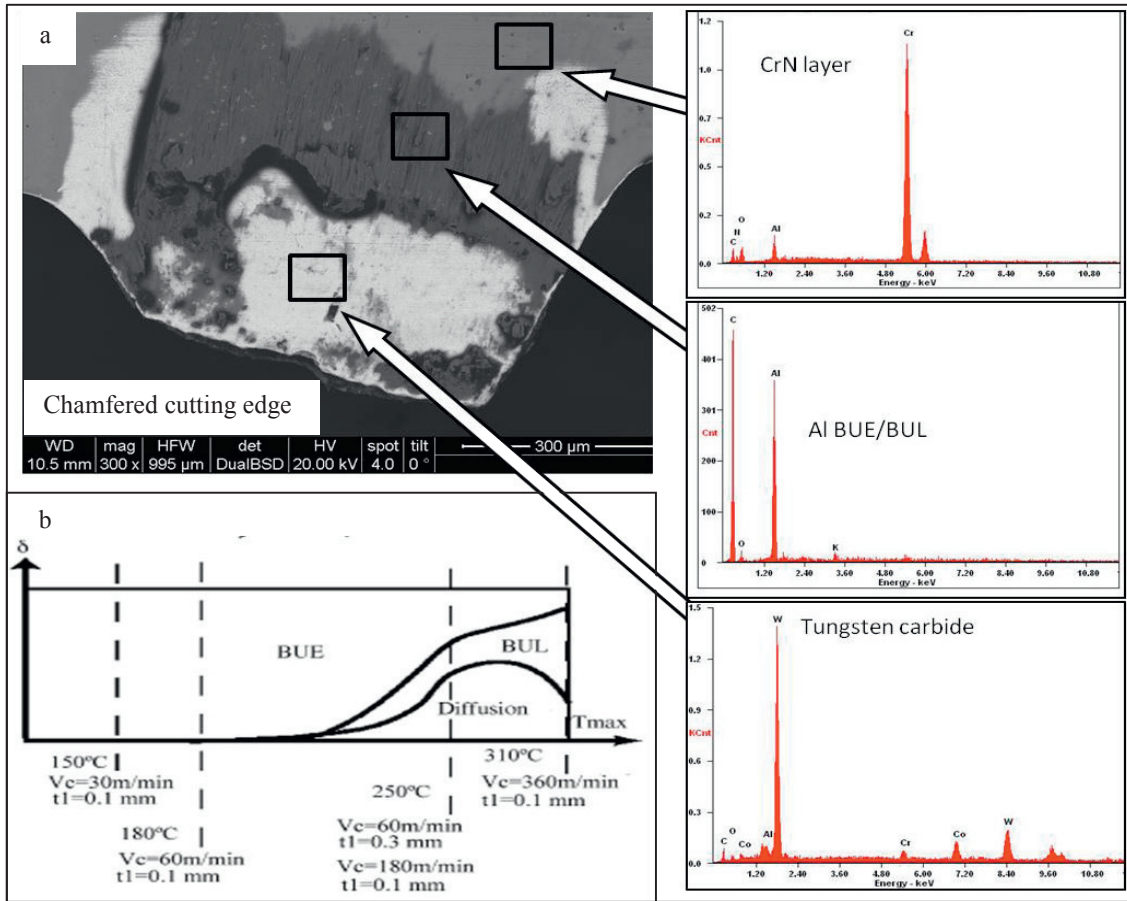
(a) Adhesion of Aluminum the tool rake face and the EDX spectroscopy; (b) Tool wear mechanism as a function of cutting and tribological conditions in dry machining of aluminum alloys [2].
